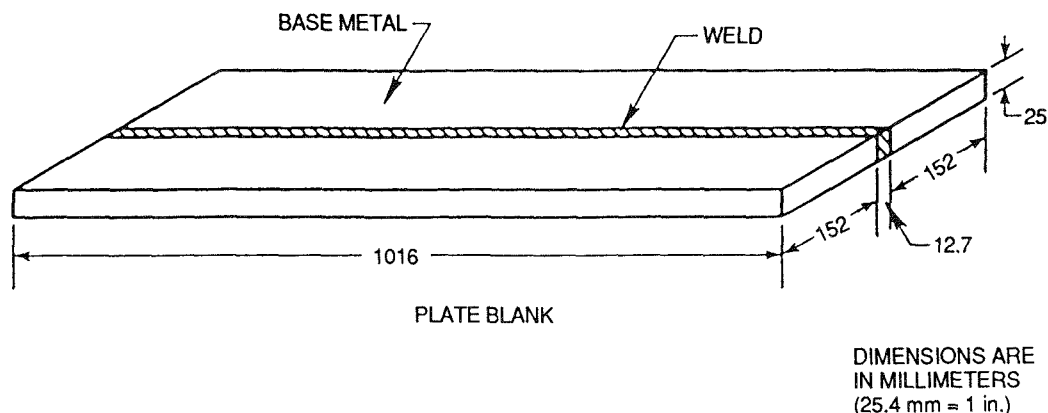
Weld blank configurations for flat-plate weldment specimens (25.4 mm = 1 in.).
